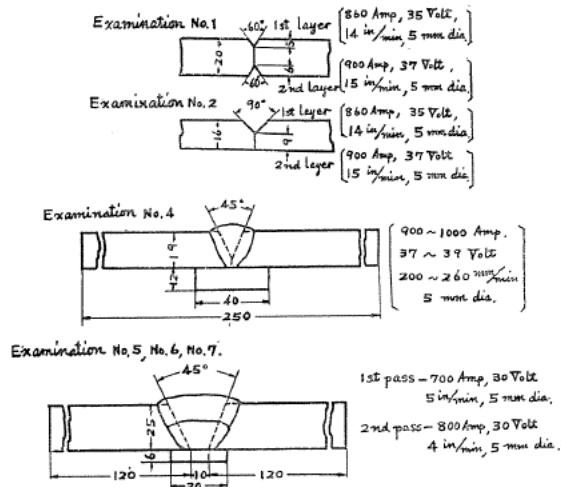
Types of joint adopted in the case of submerged arc welding.
